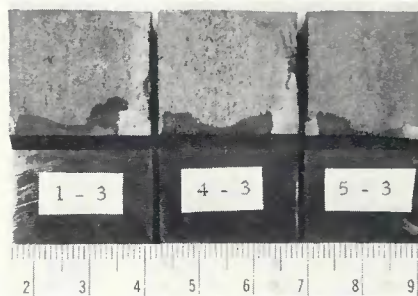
Fracture surfaces of the HAZ specimens that exhibited pop-in at 111 K (-260 F)
